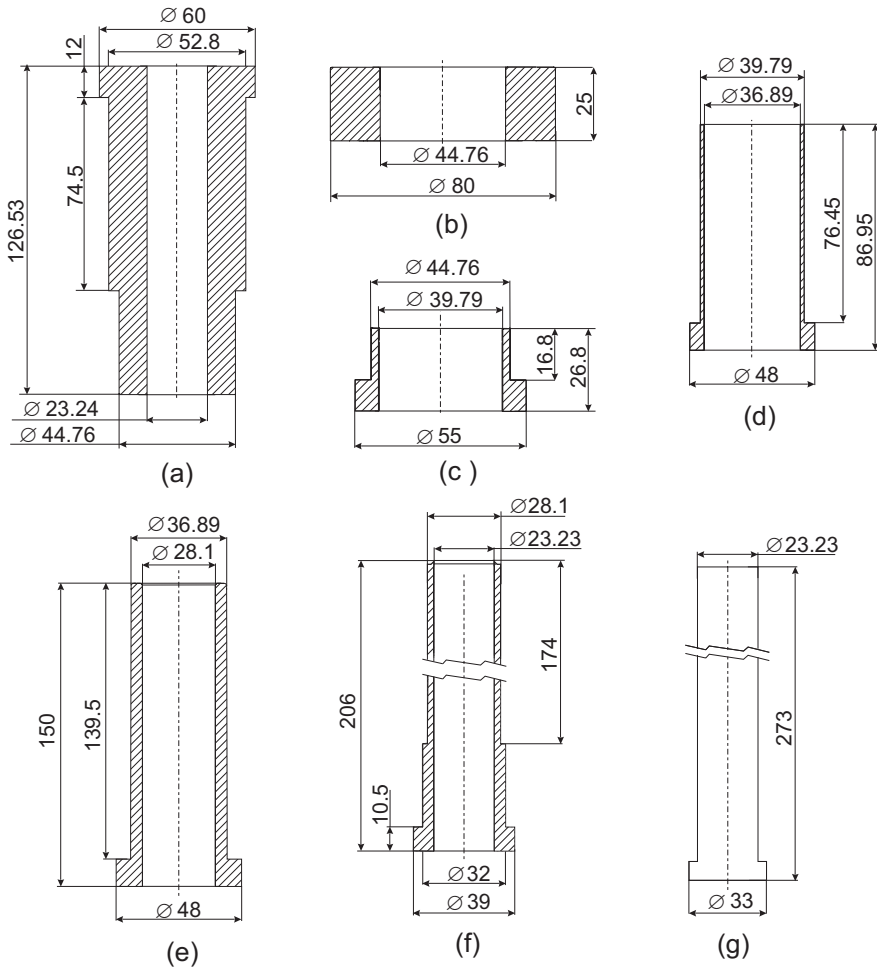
Tooling dimensions (mm). (a) Upper punch (b) Die (c) Lower outer punch-II (d) Lower outer punch-I (e) Lower middle punch (f) Lower inner punch (g) Core rod.
